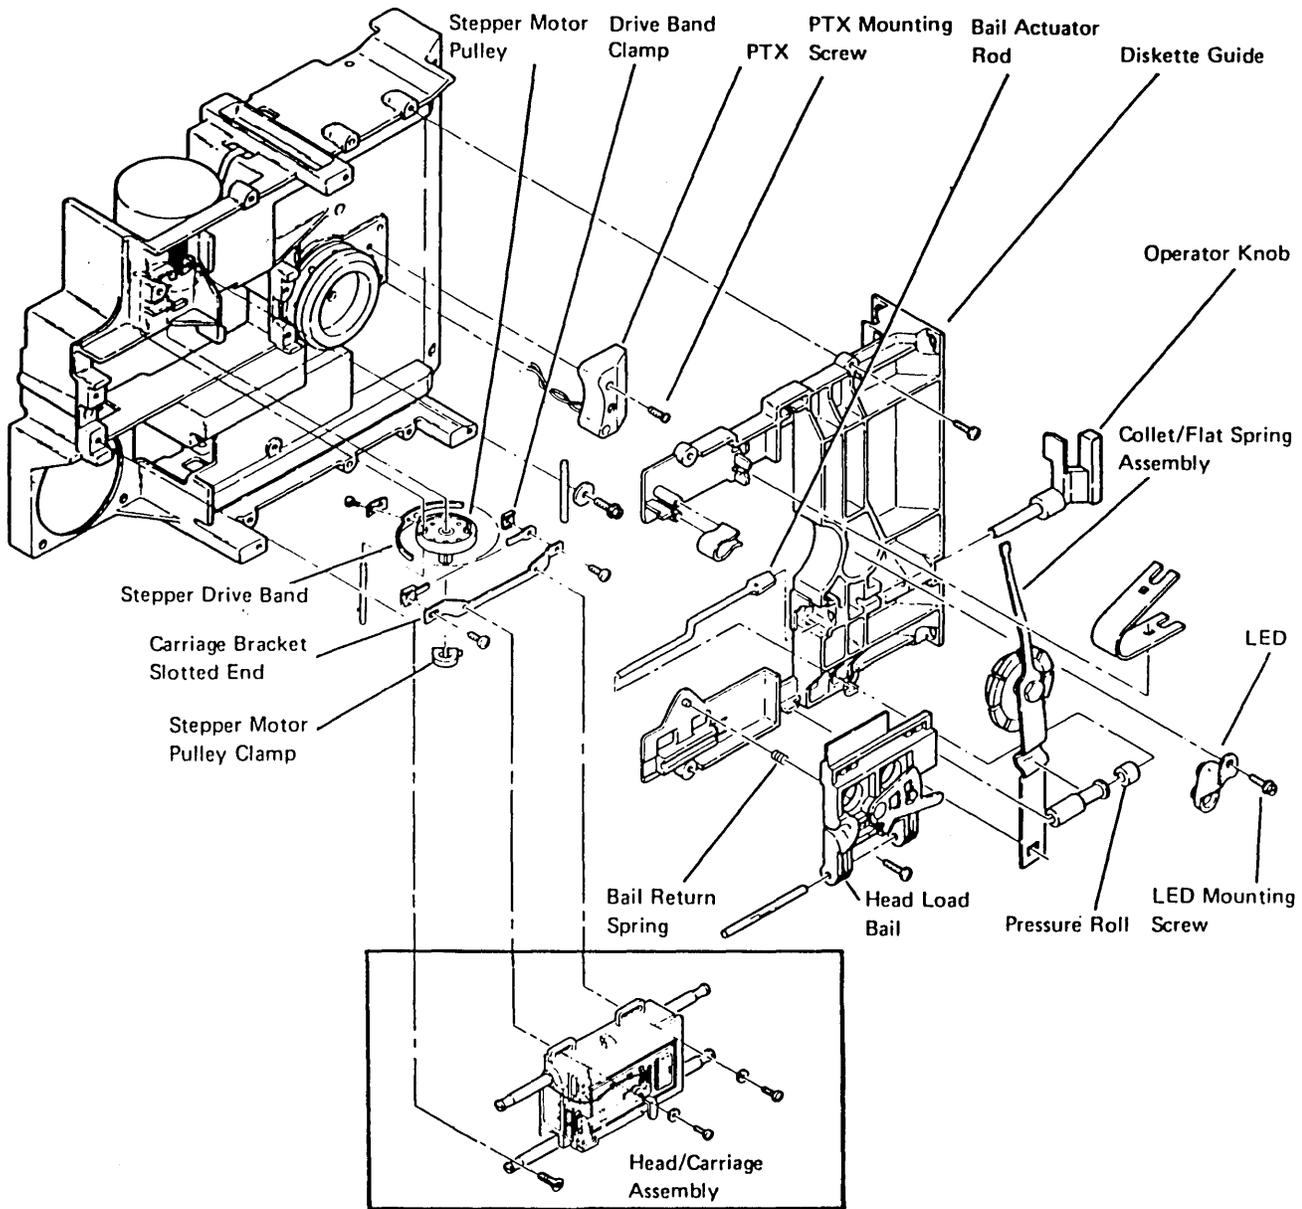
(Part 1 of 5). Diskette Drive Parts
